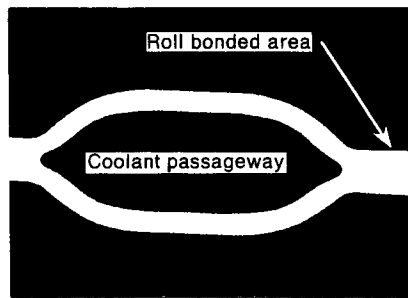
Cross-section of a roll bonded panel with integral cooling passages.
